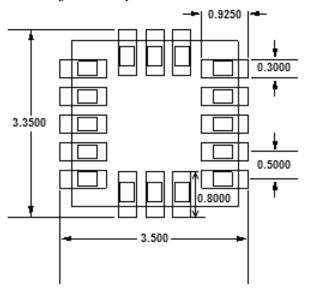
Recommended Printed Wiring Board Land Pattern (Dimensions shown in millimeters)
